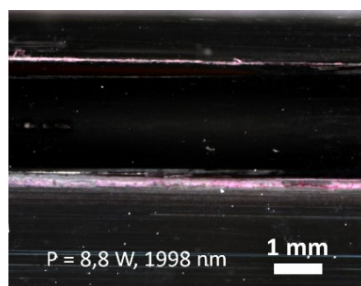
Top view of weld seam created with a laser power of 8,8 W, laser wavelength 1998 nm, feed rate 10 mm/s, crack initiating medium: Crack-Knacker PS-2;
